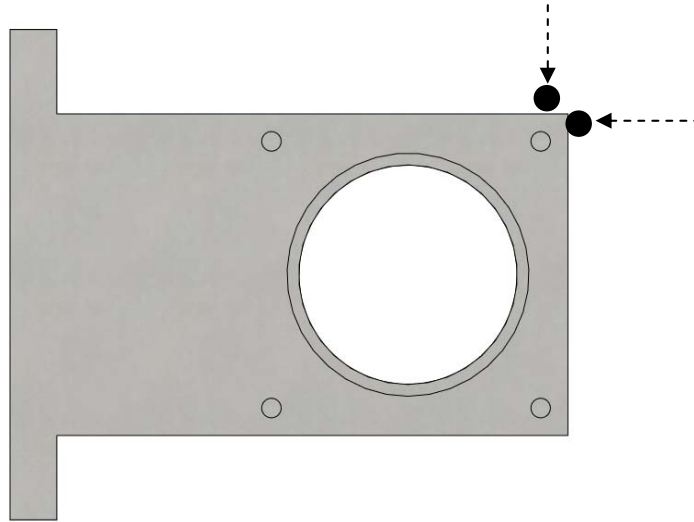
Use edge finder to locate edges of bearing housing and zero mill
